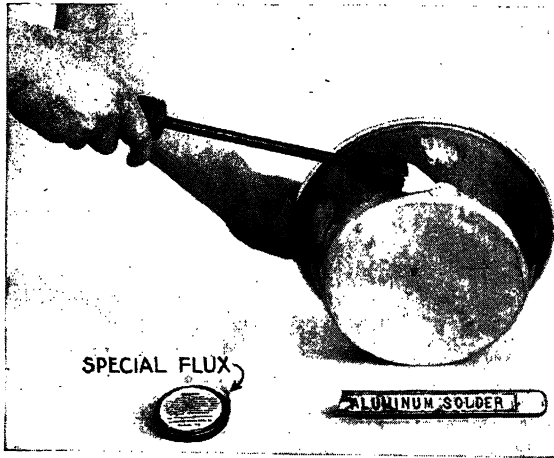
A special flux and aluminum solder is used to solder aluminum
